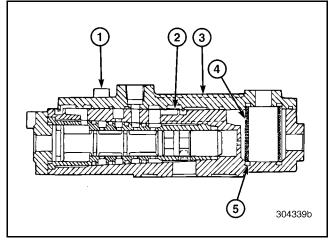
Cutaway View of Range Shift Interlock Valve Assembly
